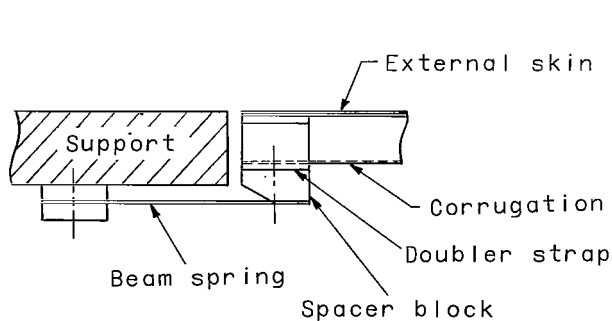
Panel construction details. All dimensions are in inches (cm).
